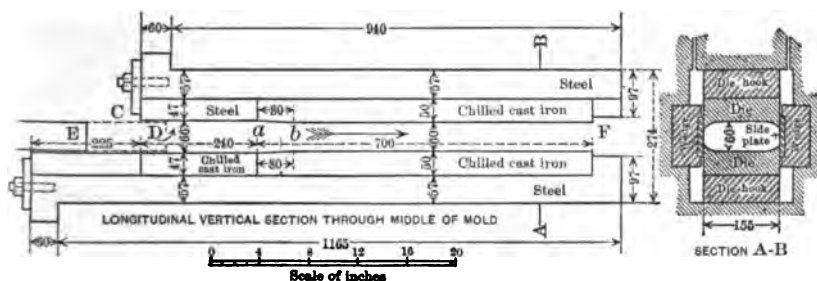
Vertical sections through mold box of lignite-briquetting press; dimensions are in millimeters (25.4 mm.=1 inch).
